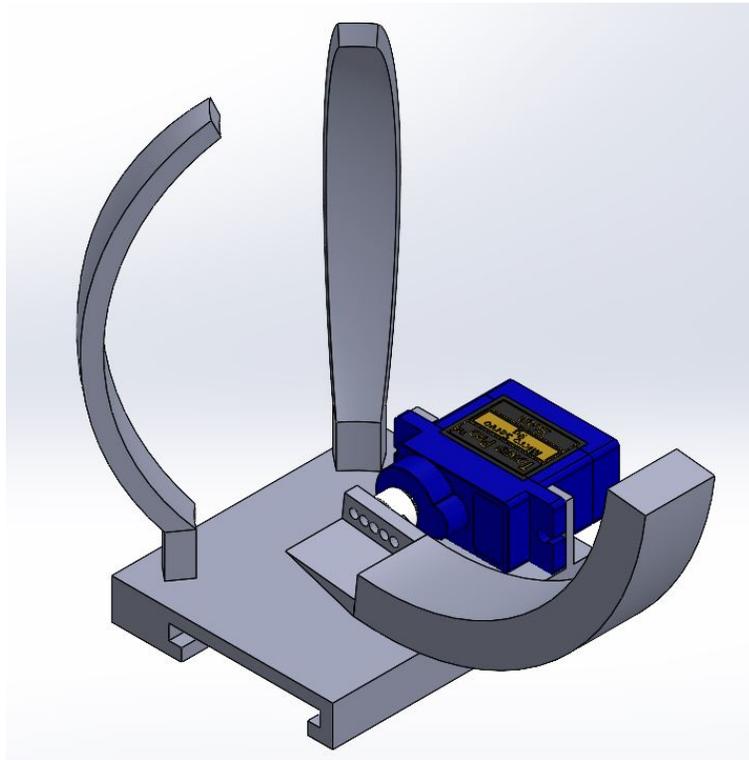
Full Bear Claw mechanism with the motor, final claw, and static claws.
